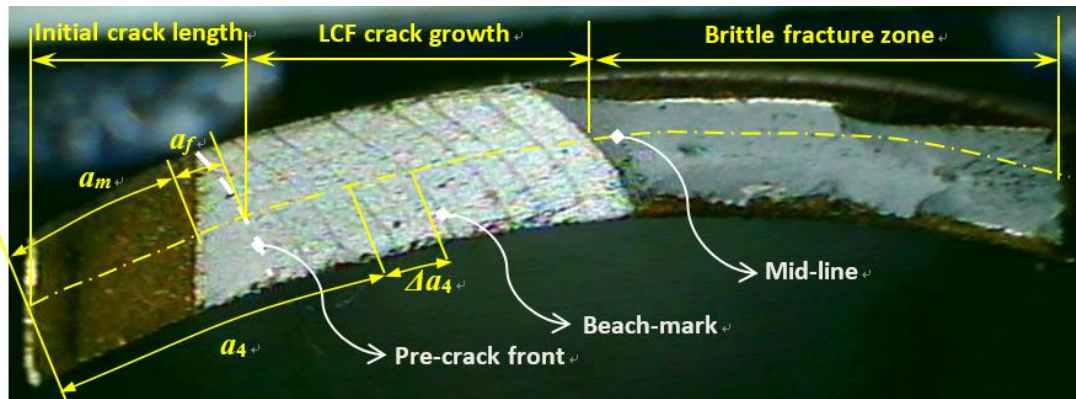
Fracture surface of the broken arc specimen CF4
